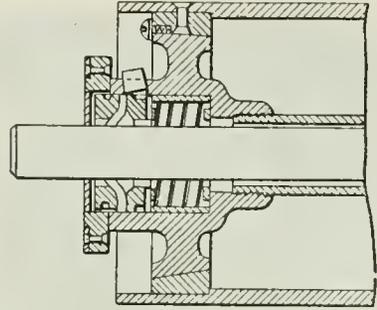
Latest Type of Pantograph Roller Designed for use with Roller Bearing
